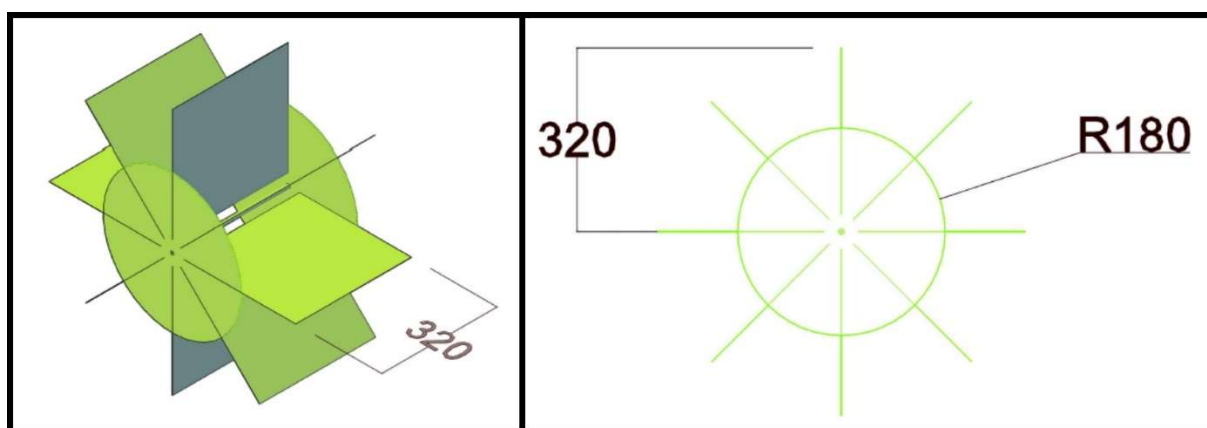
Schematic diagrams of paddle wheel with dimensions
